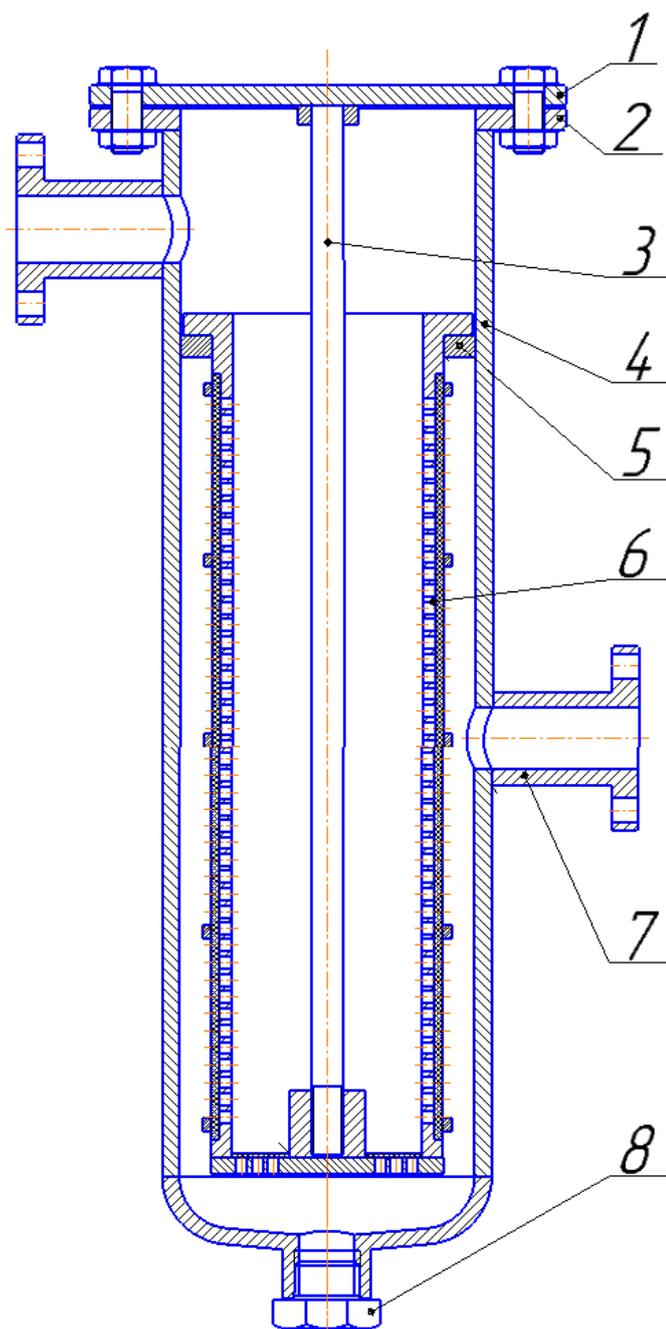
Secondary oil filter design: 1 – cover, 2 – flang, 3 – stem, 4 – body, 5– collet, 6 – filter, 7 – adapter, 8 – slide valve
